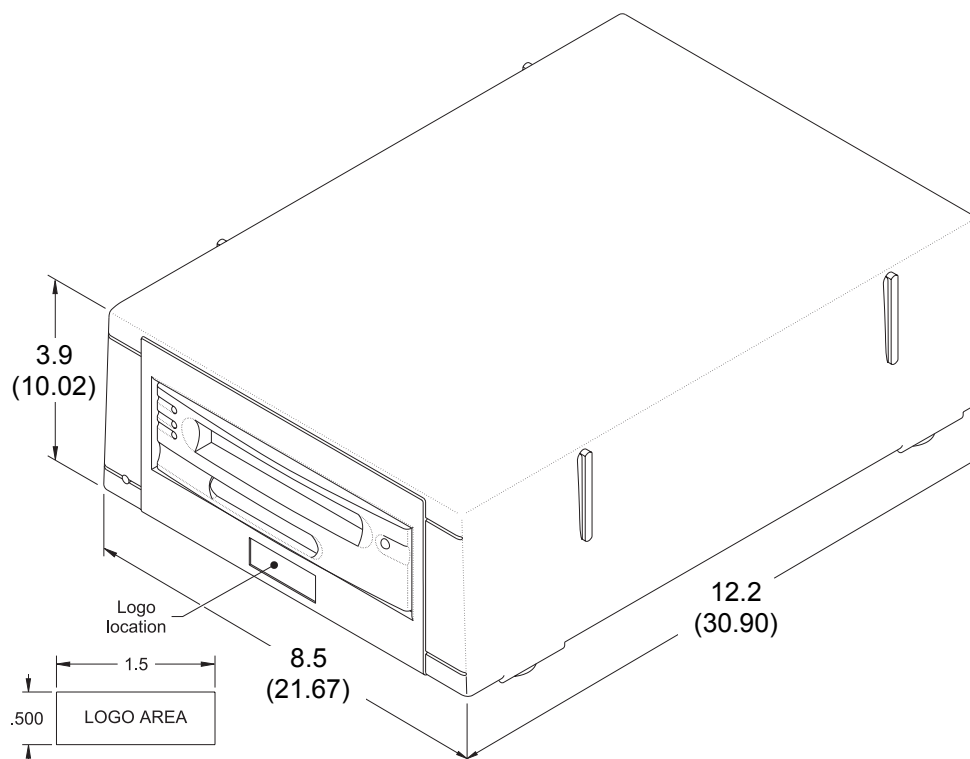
Dimensions of the tabletop tape drive in inches (and centimeters)
